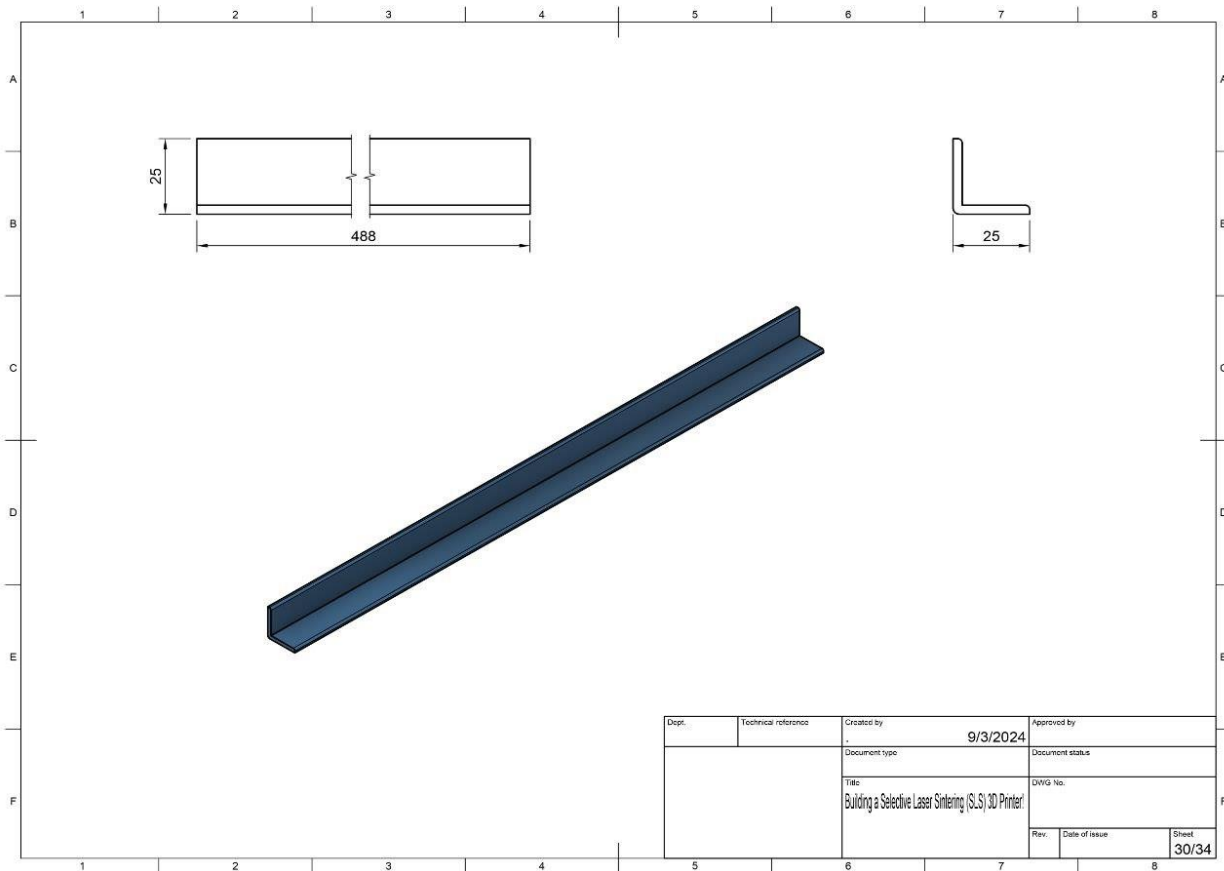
90 degree angle shape used instead of extruded aluminum columns
